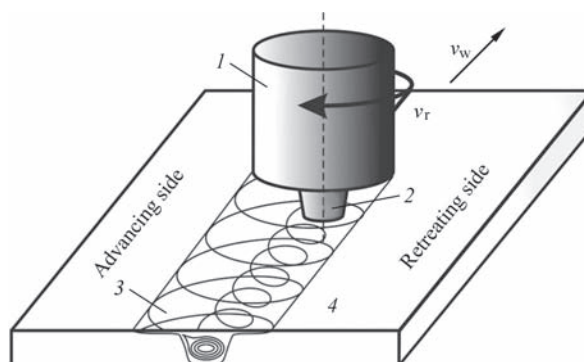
Schematic of FSW process: 1 — tool shoulder; 2 — tool pin; 3 — weld; 4 — welded blanks
